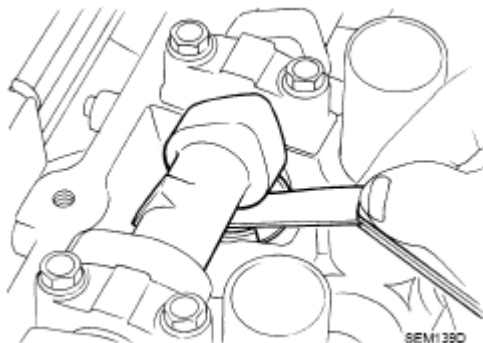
Checking Clearance Between Valve Lifter And Camshaft
